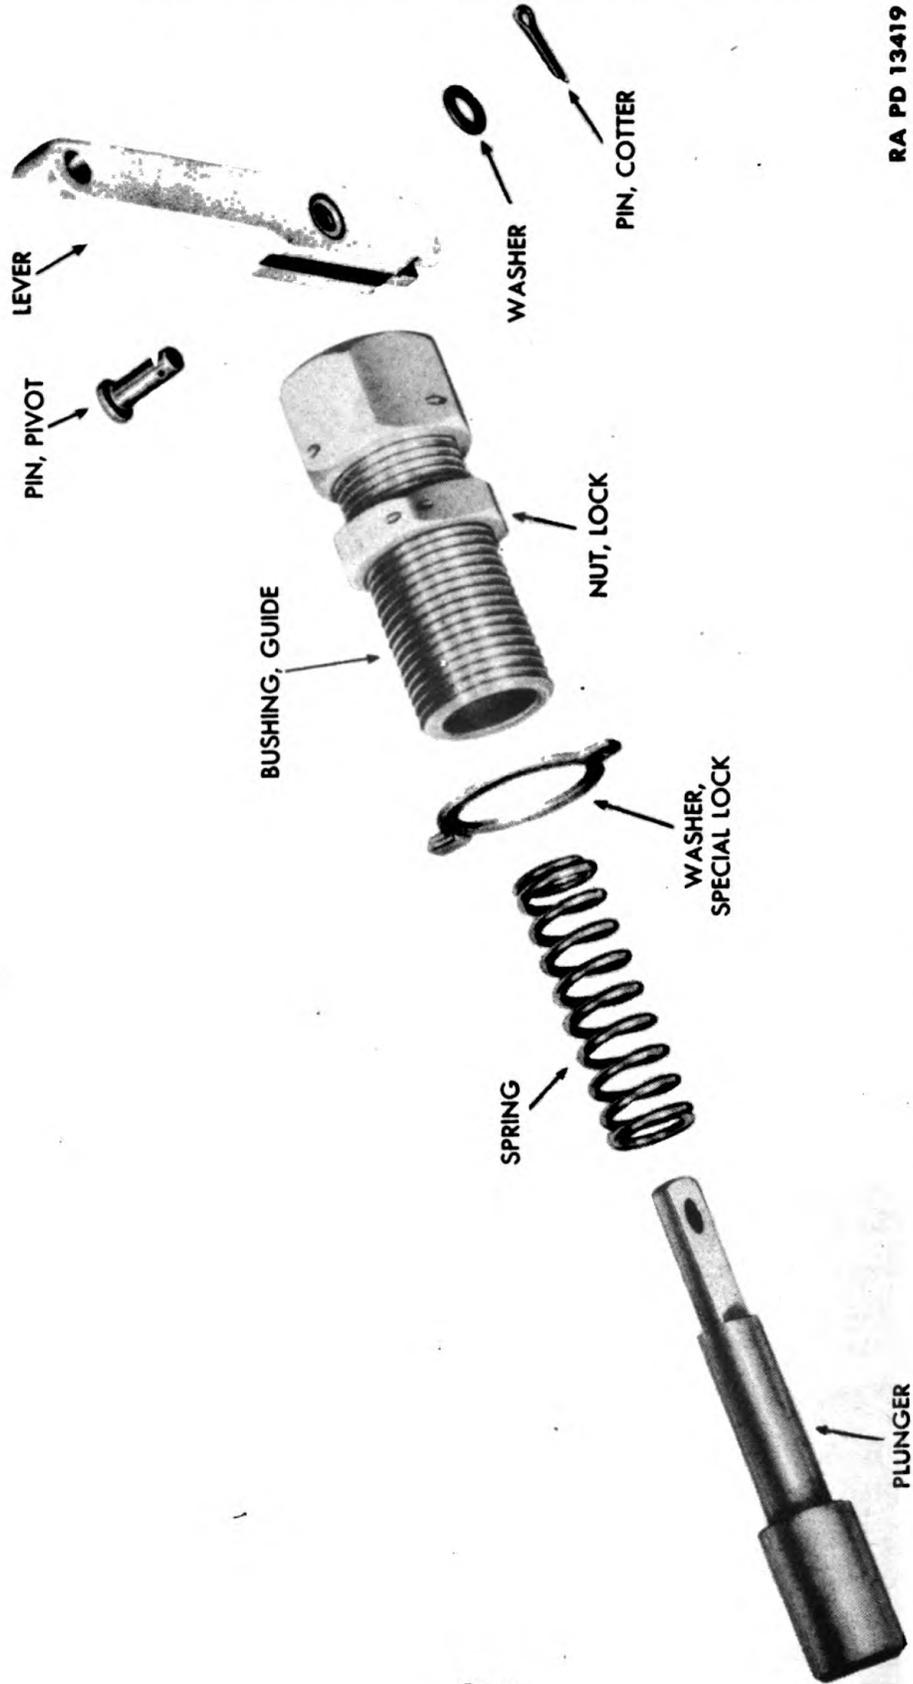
Fuel Pump Control Rod Assembly—Exploded View
